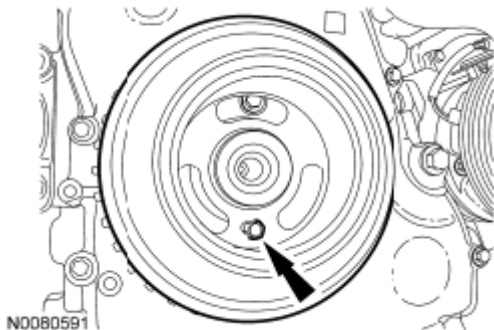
Locating Crankshaft Pulley Hole Bolt (6 mm x 18 mm)
